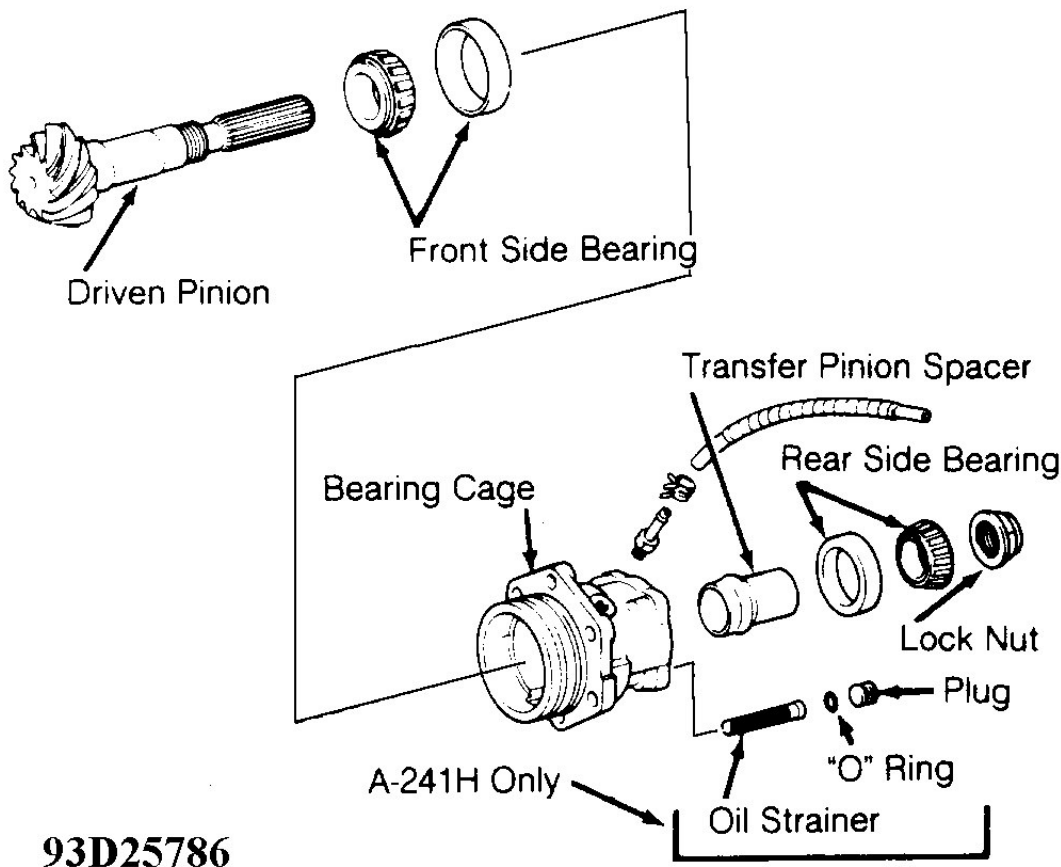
Exploded View Of Transfer Driven Pinion Bearing Cage (A-241H Shown; A-540H Is Similar)
